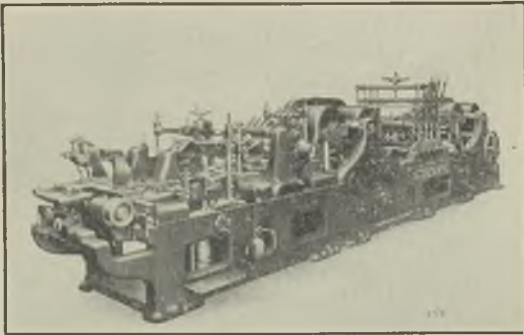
A MODERN PLANING, MOULDING AND MATCHING MACHINE.
